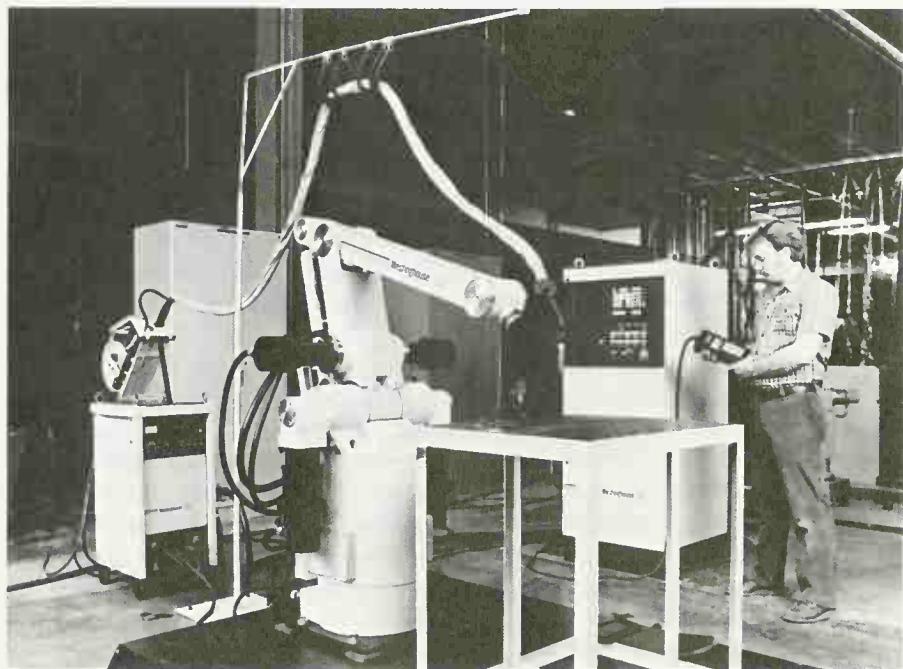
Robot M16 welding station. (Courtesy of Westinghouse Electric Corp.)
